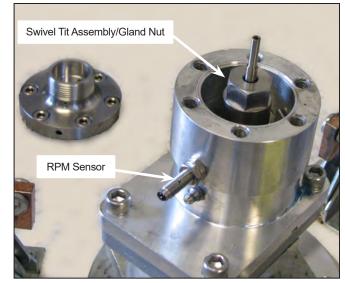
Swivel tit assembly/gland nut installed on the thru-shaft and torqued to 50 Ft lbs.
